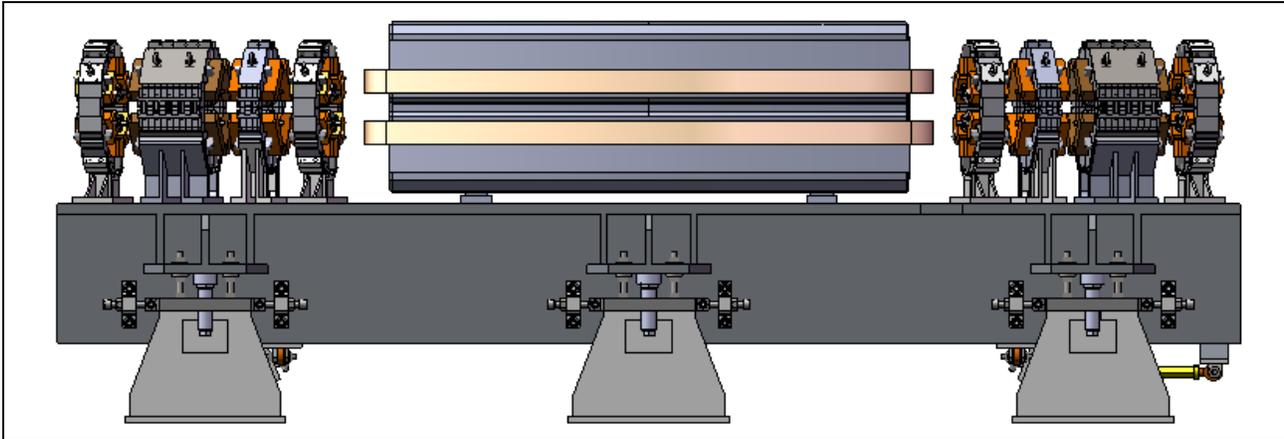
Second Proposal of SESAME Girder System (P2C2)
